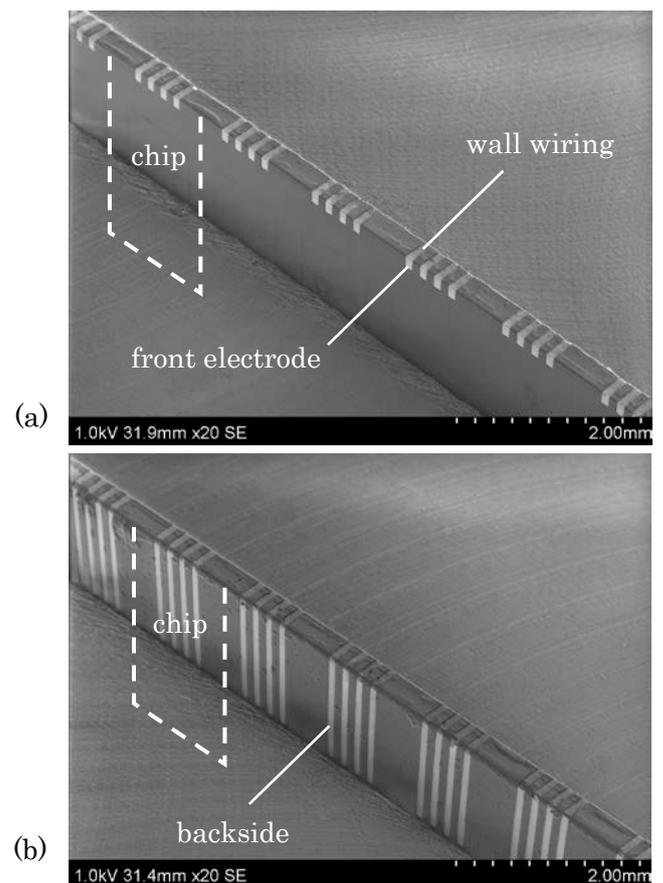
One-dimensional array of Si chip. (a) front and (b) back sides with the wiring pattern.
